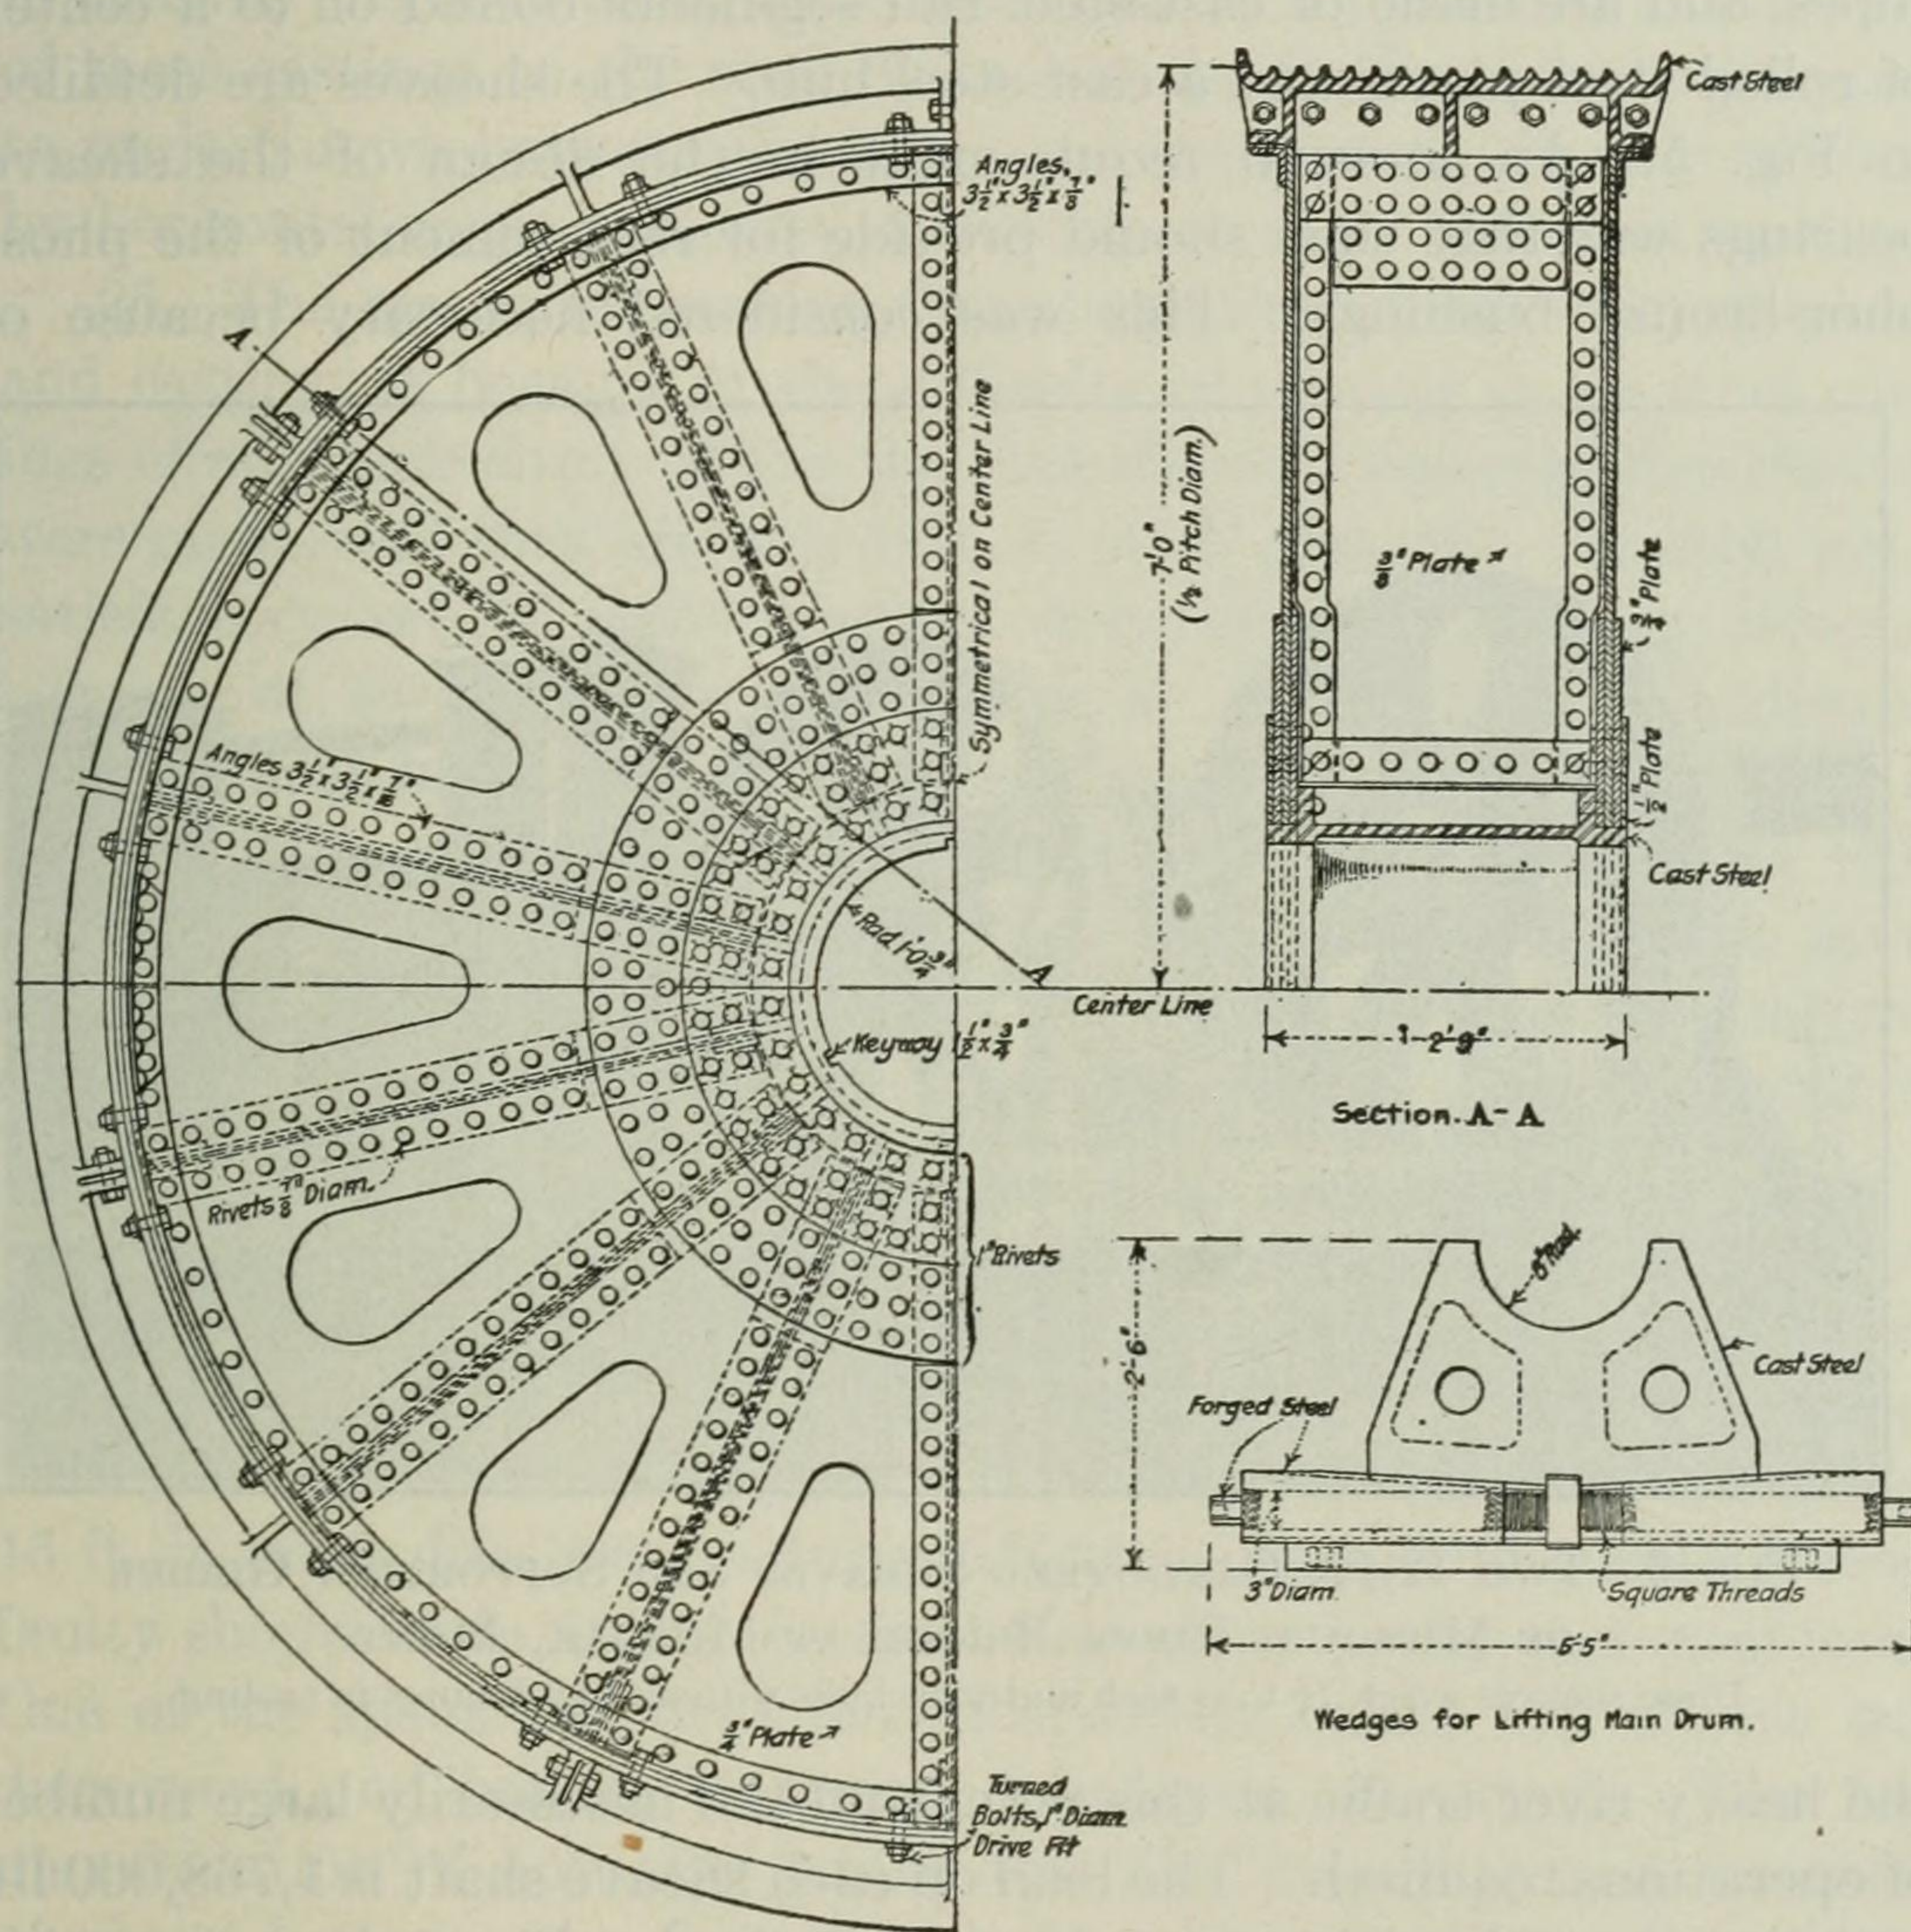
14-FT. PITCH DIAMETER SHEAVE, WILLAMETTE RIVER BRIDGE, OREGON-WASHINGTON RAILROAD AND NAVIGATION CO.
